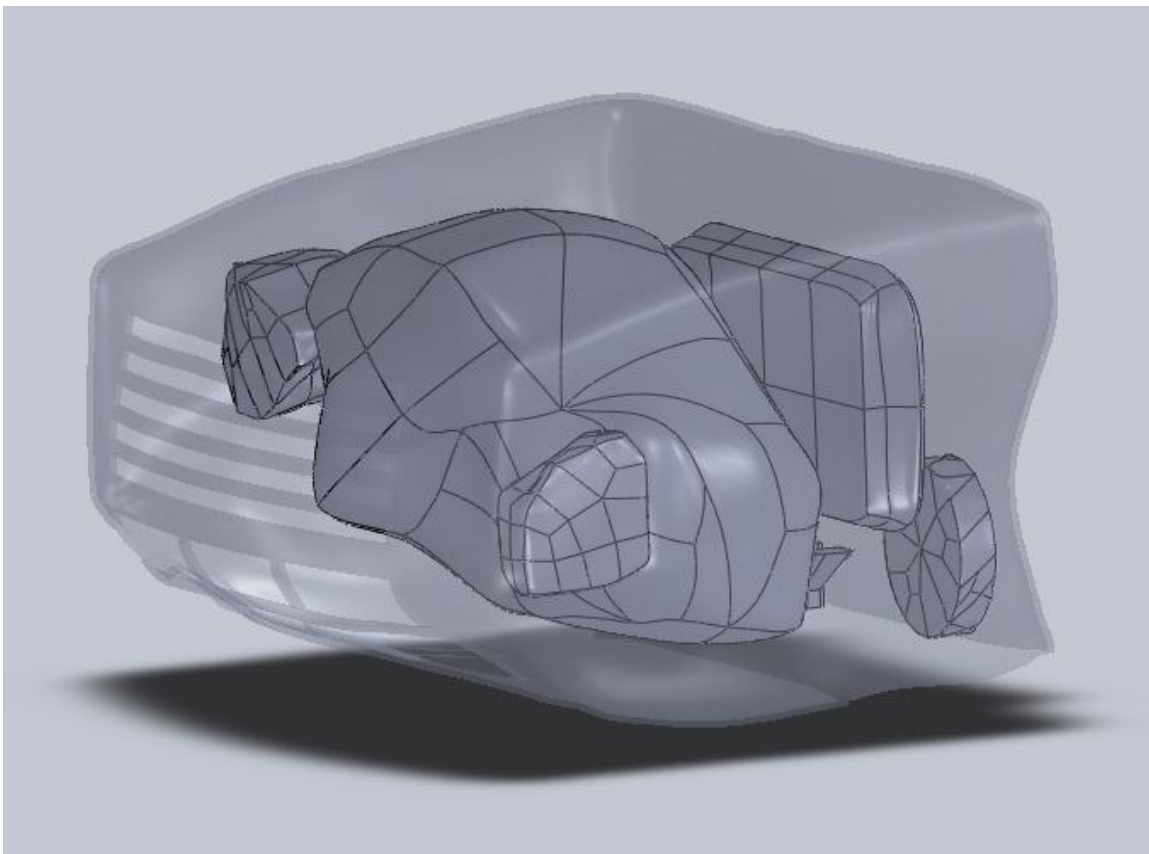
Layout of the components in the car under hood in which the radiator is placed behind the engine
